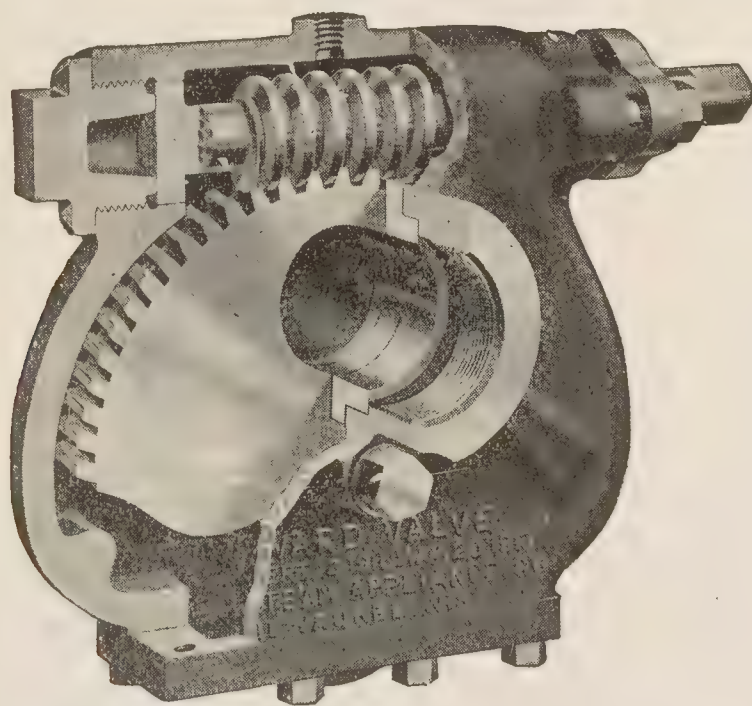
,160.—Ward worm gear blow-off valve. *In construction*, the body of the valve is made of semi-steel and the working parts of admiralty bronze.
